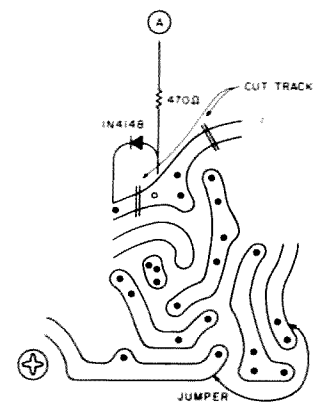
A 1N4148 diode mounts on the foil side, while the 470-ohm resistor mounts on component side next to J103.
